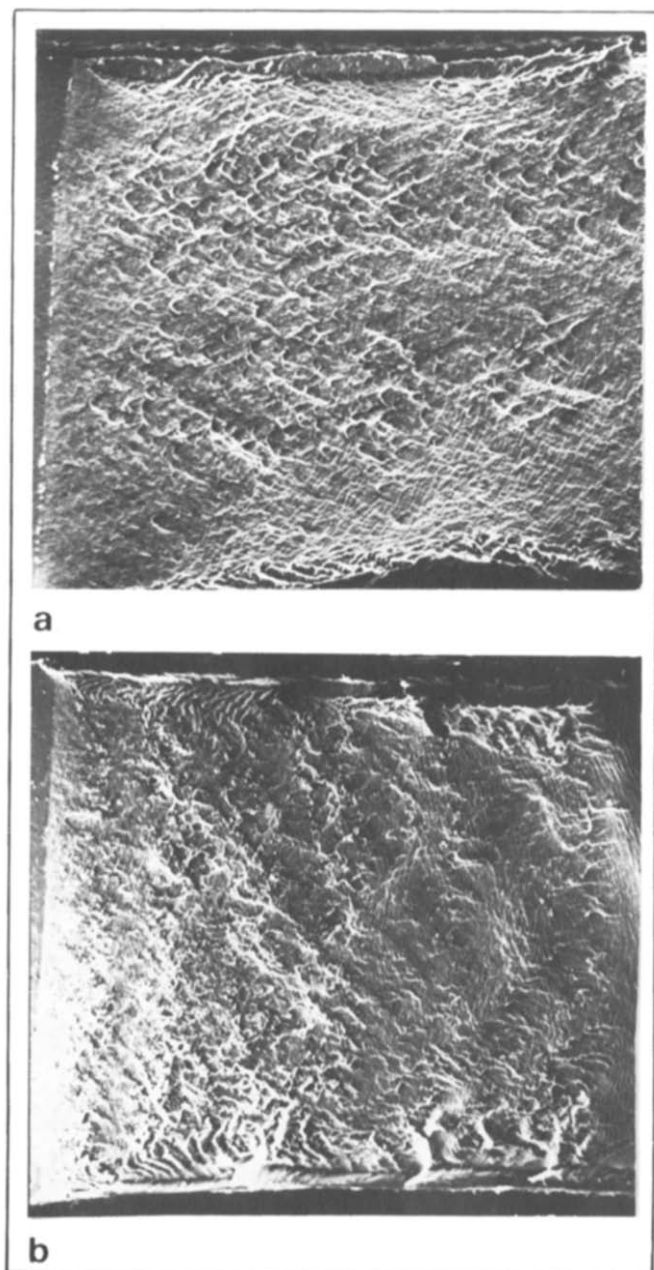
Fracture surfaces of specimen with machined skin, tested at: (a) 5 Hz and (b) 10 Hz (to be compared with Figs 11c and 11d, respectively)
